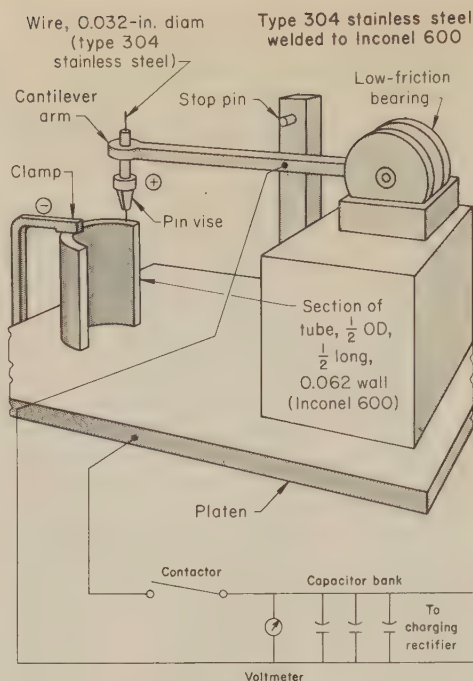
Setup for capacitor-discharge percussion welding of a type 304 stainless steel support wire to an Inconel 600 metallographic specimen (Example 178)
